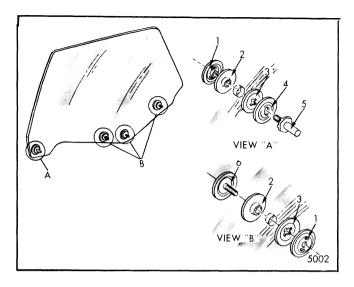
Rear Door Window Assembly - 6CB69 Styles
